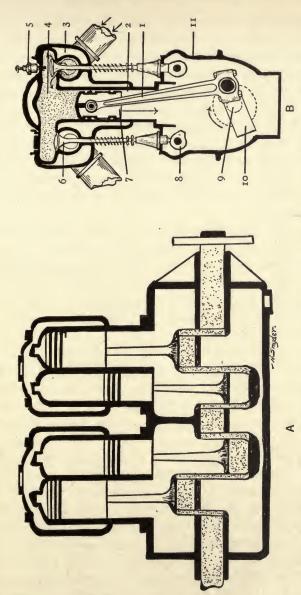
Two diagrams of a gasoline engine. A—Cross-section of engine. B—Cross-section of cylinder and crank shaft at right angles to diagram A. r=piston rod; 2=cylinder; 3=water space; 4=gas mixture; 5=spark plug; 6=valve; 7 = piston head; 8 = cam; 9 = crank shaft; 10 = crank; 11 = jacket.
